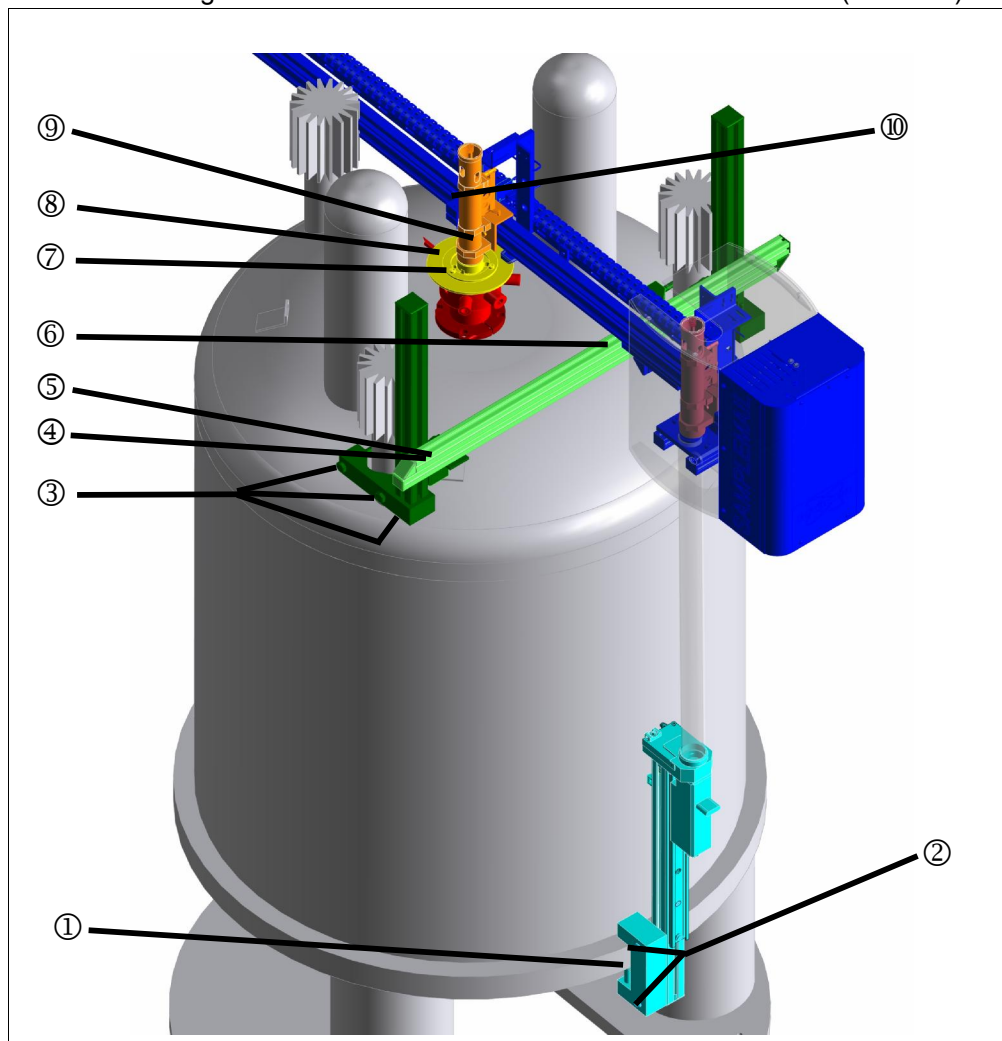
Critical screws to be tightened on the LINEAR AXIS UNIT
